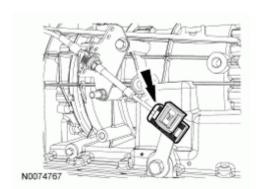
Locating Selector Lever Cable Courtesy of FORD MOTOR CO.
